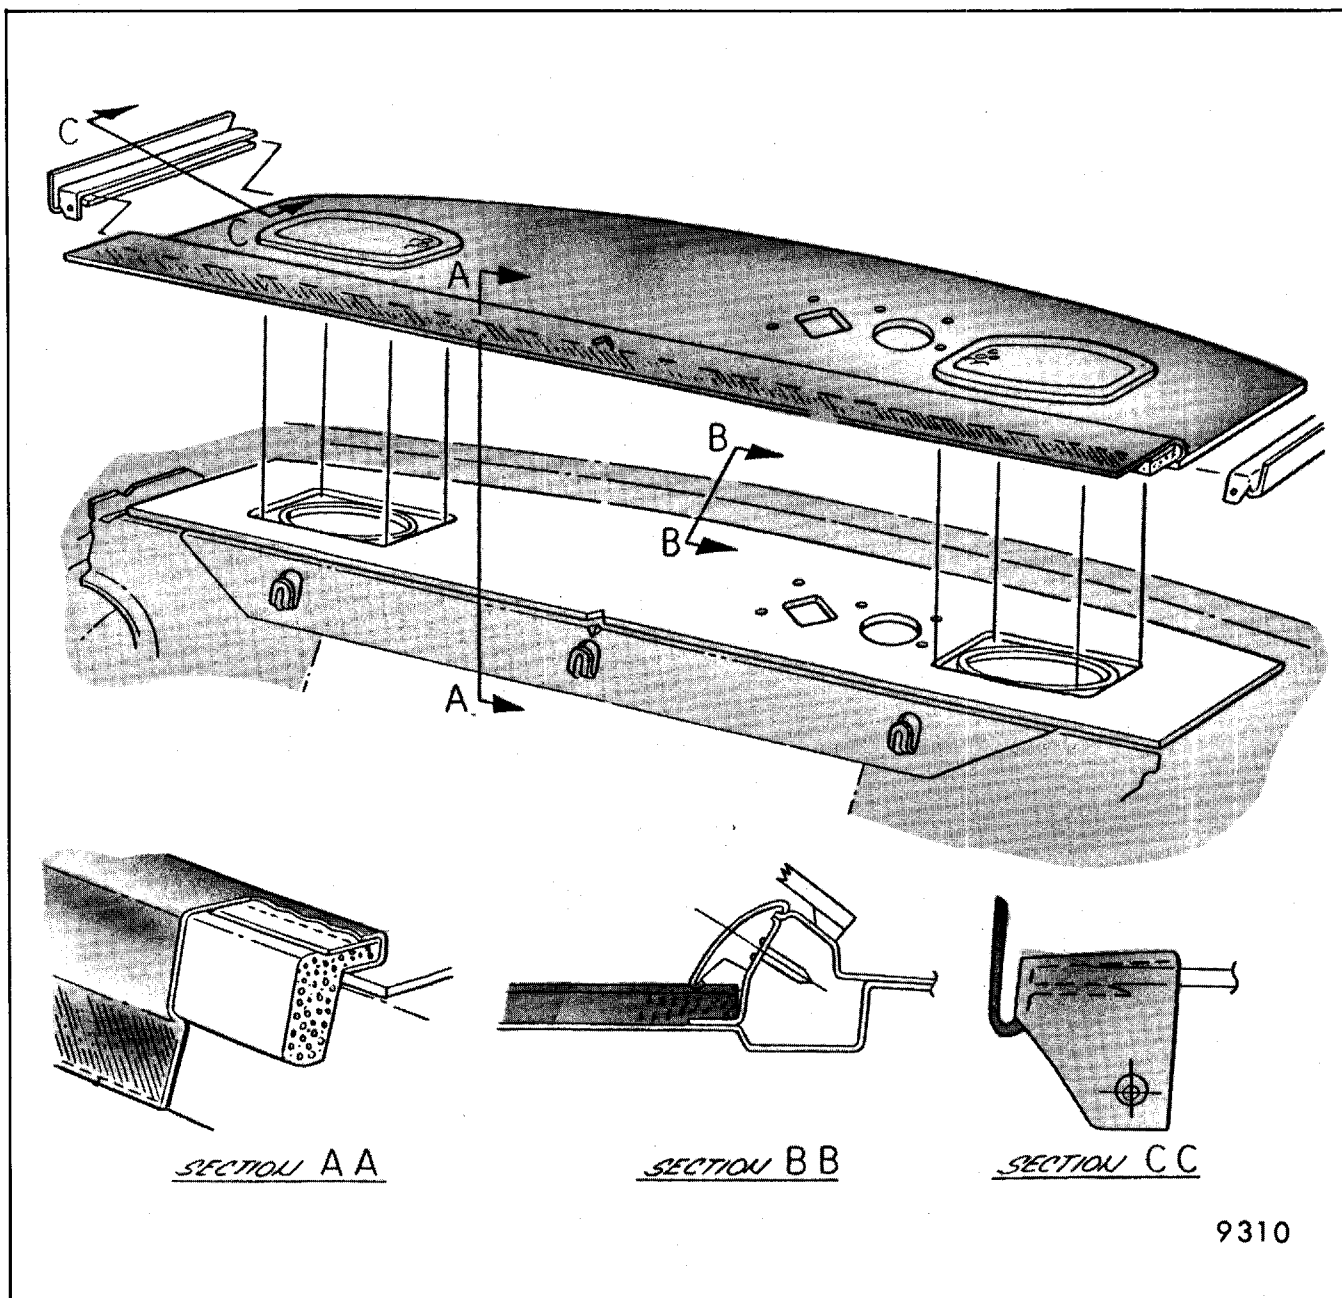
Rear Seat to Back Window Trim Finishing Panel - "B- 69" Style Shown (Other Styles Similar)
